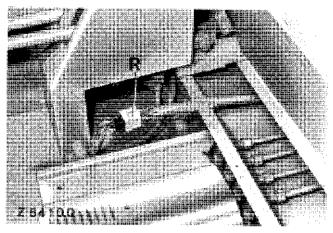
Disconnecting Wiring Harness Plug next to Operator's Seat (Shown with Operator's Seat Removed)
